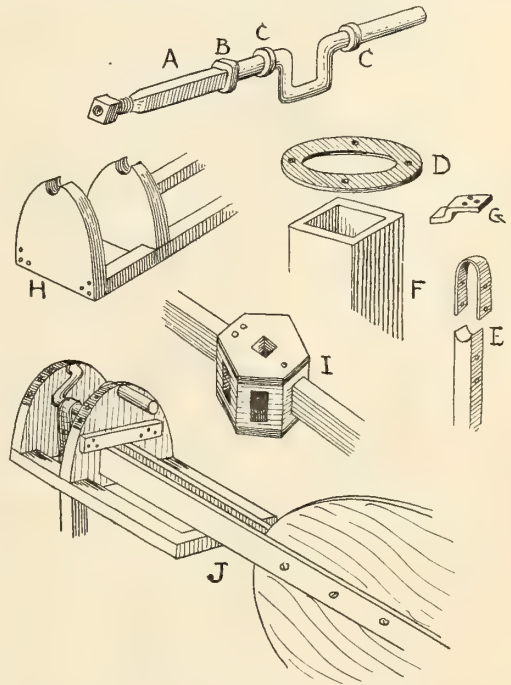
DETAILS OF THE PUMPING WINDMILL.
